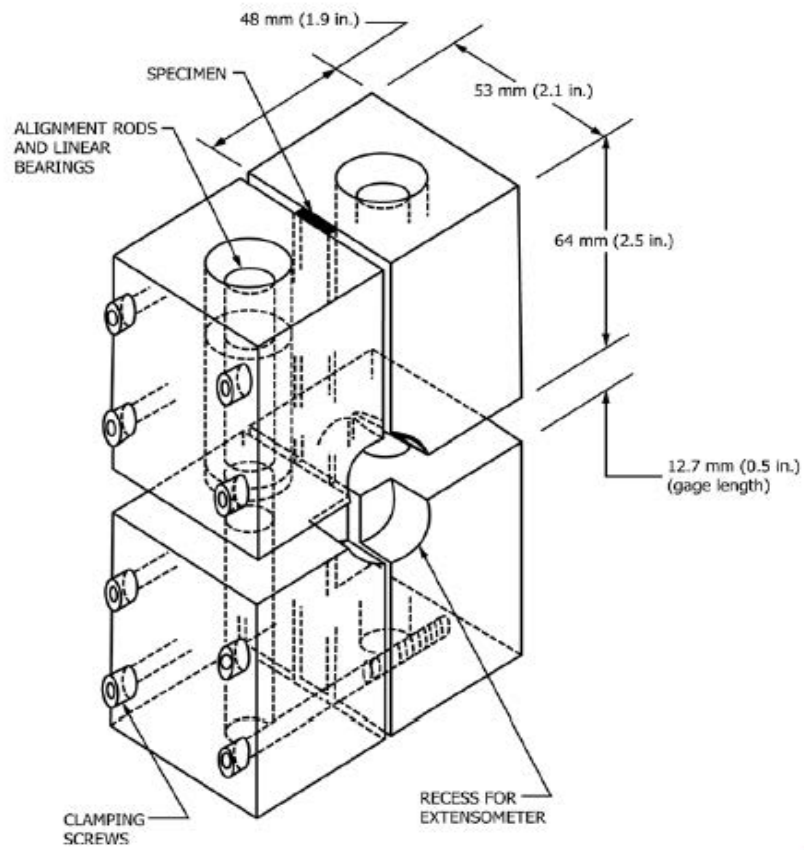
Dimensioned sketch of a CLC test fixture [50]
